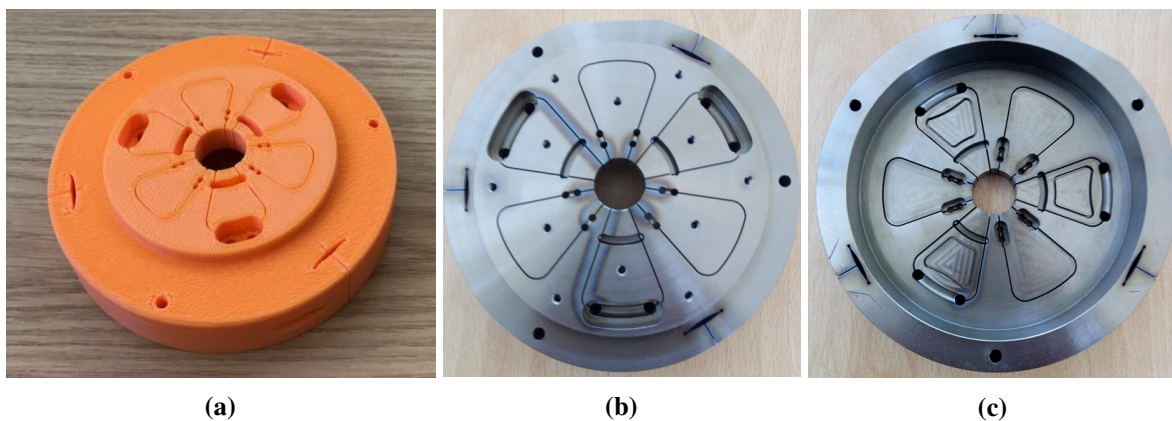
Photograph of rapid prototype and manufacturing of smart chuck: (a) 3D printed part; (b) final manufactured part, front view; (c) final manufactured part, back view
